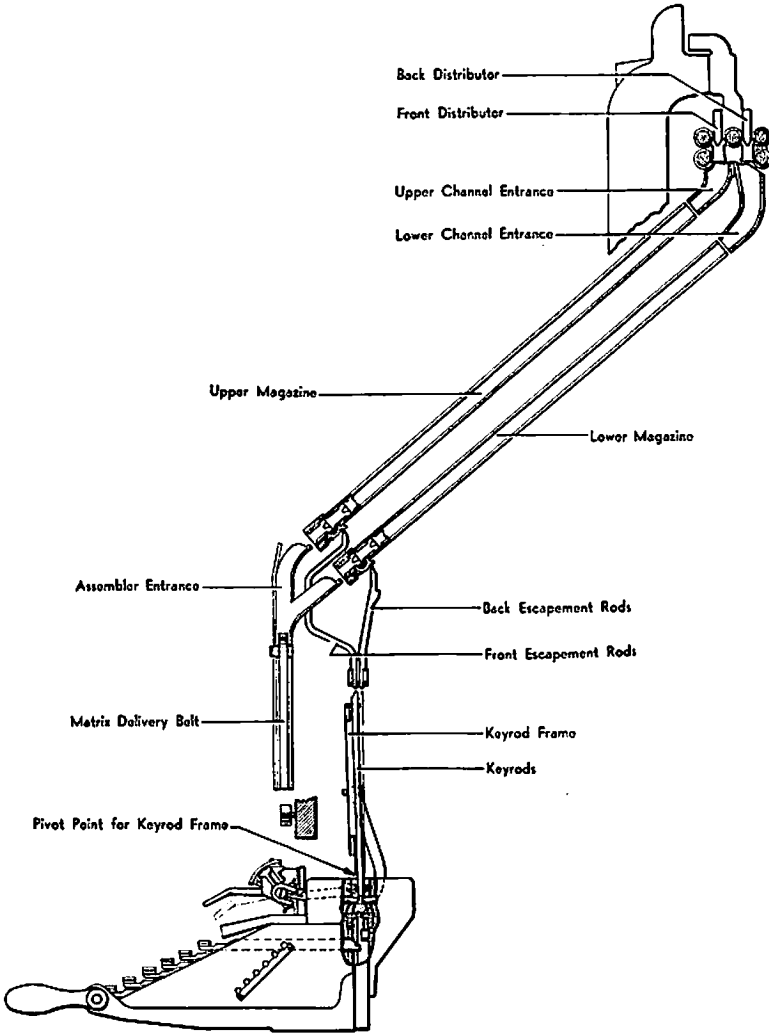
Side View of the Mixer Machine, showing the double assembling, distributing and magazine assembly established for "mixed" composition. The illustration shows only the main magazine unit — when the machine is equipped with a side unit, the same basic double assembly is provided so that matrices from two side magazines can be assembled without shifting magazines. The side magazine assembler entrance is connected with the main entrance and matrices from a total of four magazines — two main and two side — can be assembled in one line in the assembling elevator without shifting magazines. The matrices are automatically distributed to the proper magazines by the double distributor unit.
